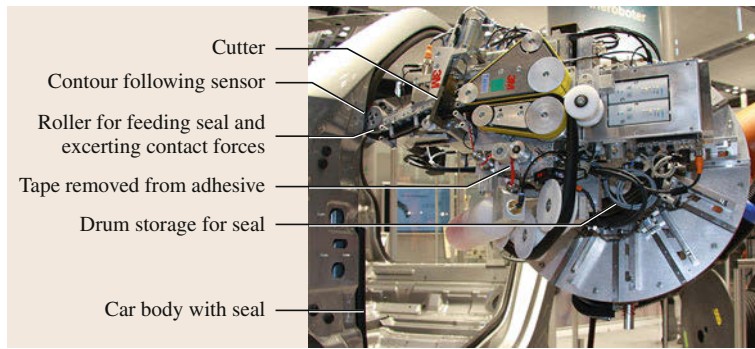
A robot-guided tool for handling and processing limb material, in this case a self-adhesive seal for car bodies
